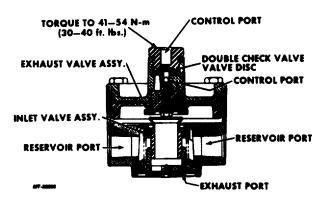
Cross Section of Midland-Ross Spring Brake Control Valve
